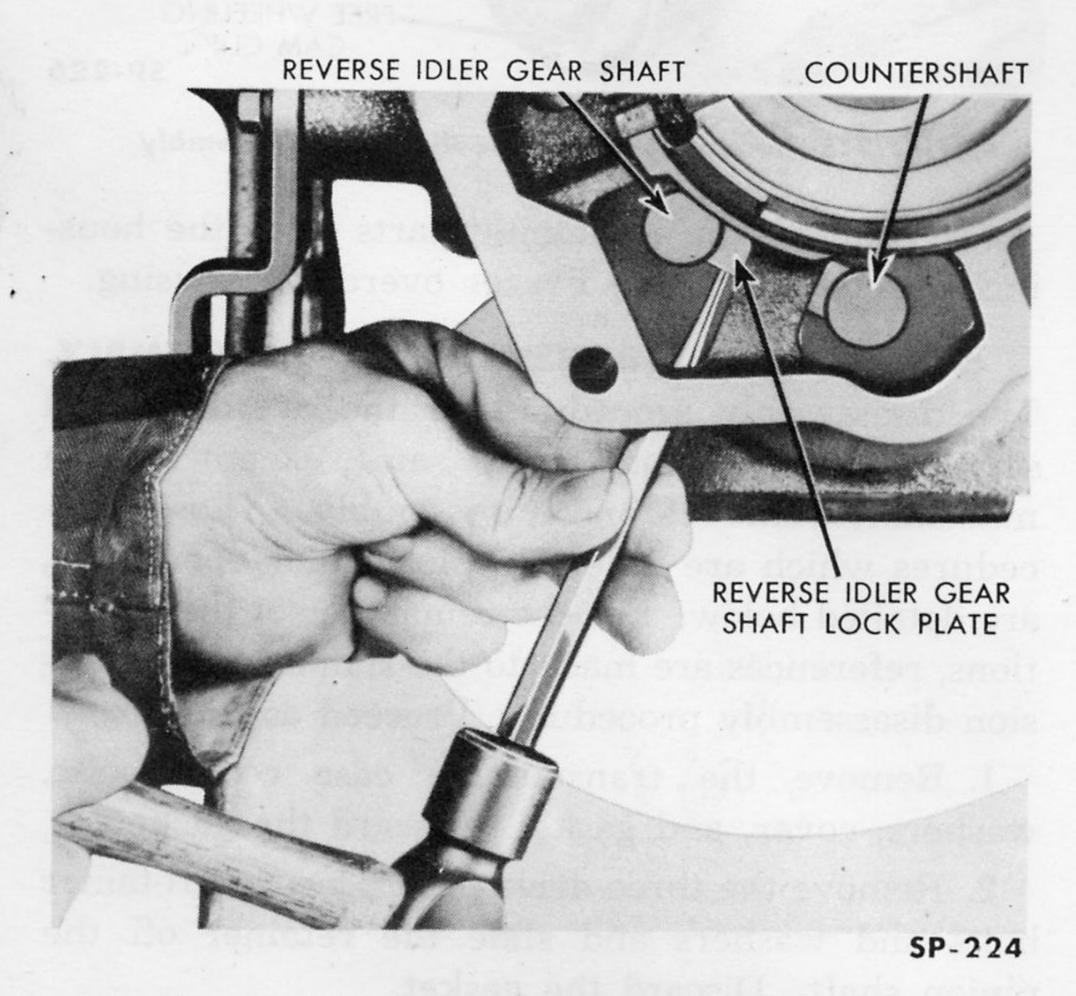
Removing Reverse Idler Gear Shaft Lock Plate
